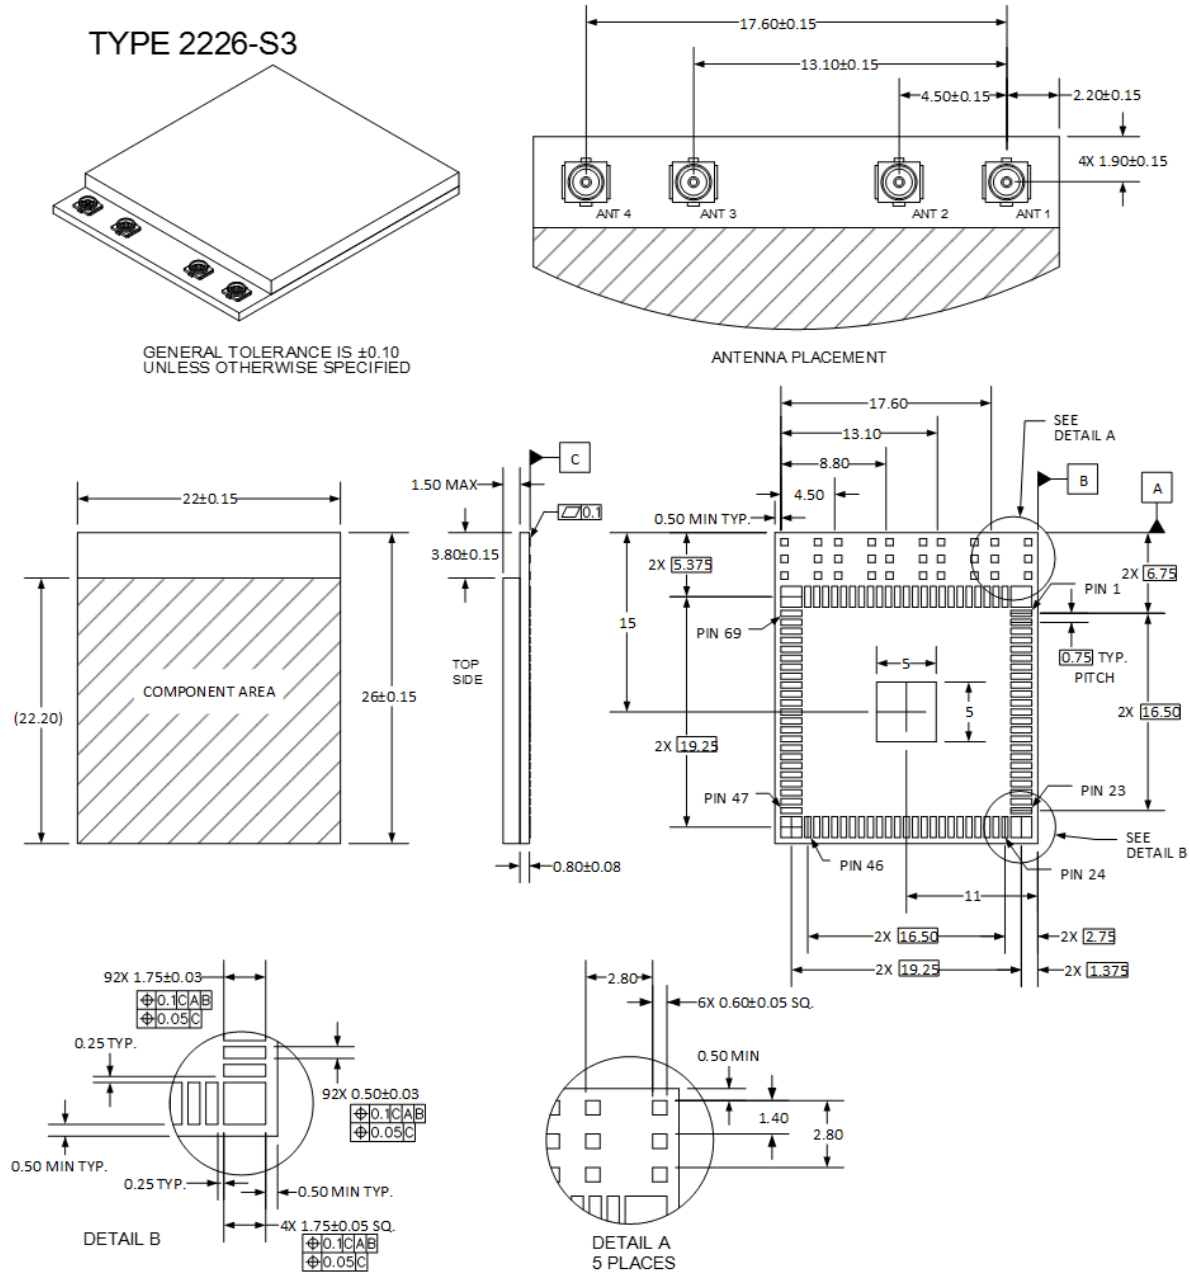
M.2 Type 2226-S3 Mechanical Outline Drawing Example
